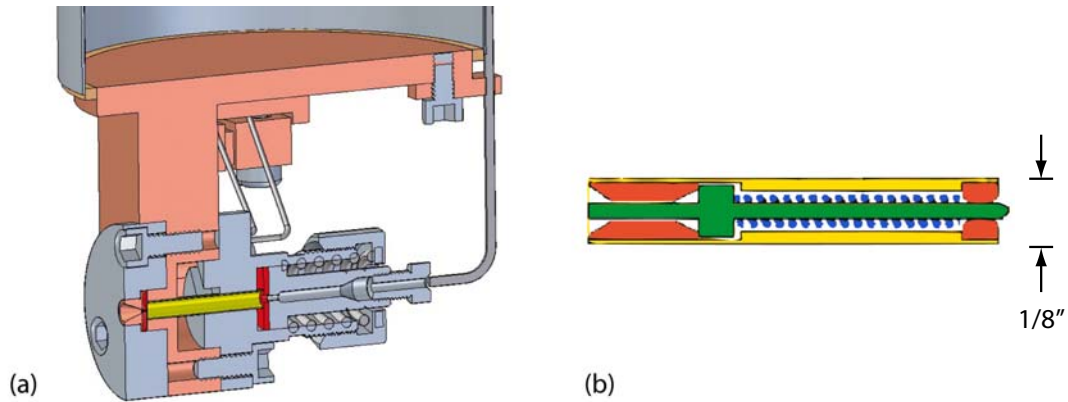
A CAD representation of the Even-Lavie supersonic nozzle. The complete nozzle apparatus is shown in (a) with a pool type cryostat which allows the nozzle to be cooled. Gas flows into the valve apparatus through the stainless steel tube on the right side of the image into a stainless steel pressure tube (yellow). The front and back of the tube are sealed using Dupont Kapton washers (red). The trumpet shaped nozzle where the gas expands and exits is on the left. An empty section can be seen surrounding the stainless steel pressure tube, and this is where the electromagnetic drive coil (not shown in this image) is located. The interior of the pressure tube is shown in (b). Gas enters the pressure tube (yellow) from the right and flows past the plunger (green), spring (blue), and guiding ceramic inserts (orange) to the nozzle exit (not depicted). The plunger forms a seal on the left side of the image with the leftmost Kapton washer from (a), and is held in place by the spring. Current in an electromagnetic coil produces a magnetic field that pulls the plunger to the right, allowing gas to expand adiabatically into the vacuum until the magnetic field is turned off and the plunger is pushed back into place by the spring. The motion of the plunger is guided by the two alumina pieces. Figure Courtesy Max Riedel.
